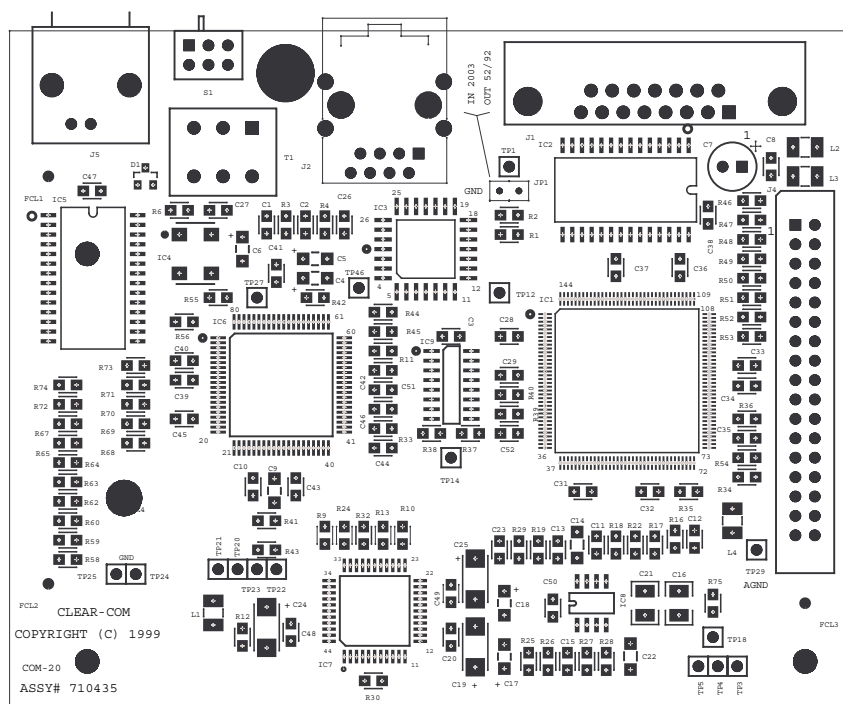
Assembly Drawing—COM-20 Communication PCB Rev. C
